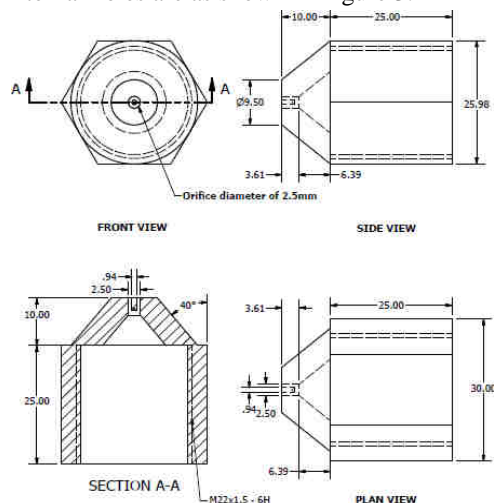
Sectional views of the nozzle tip(all dimensions are in millimeters)
